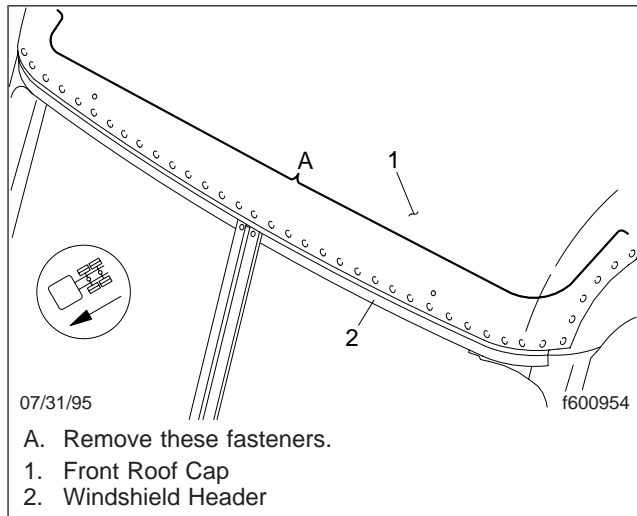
, Fasteners Holding Roof Cap to Windshield Header
